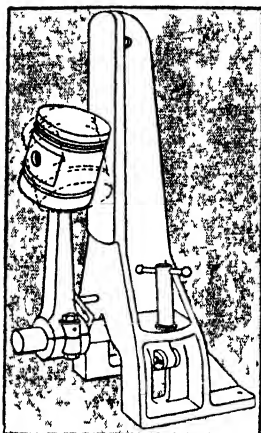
The H F Aligner with Connecting Rod and Piston in Place
